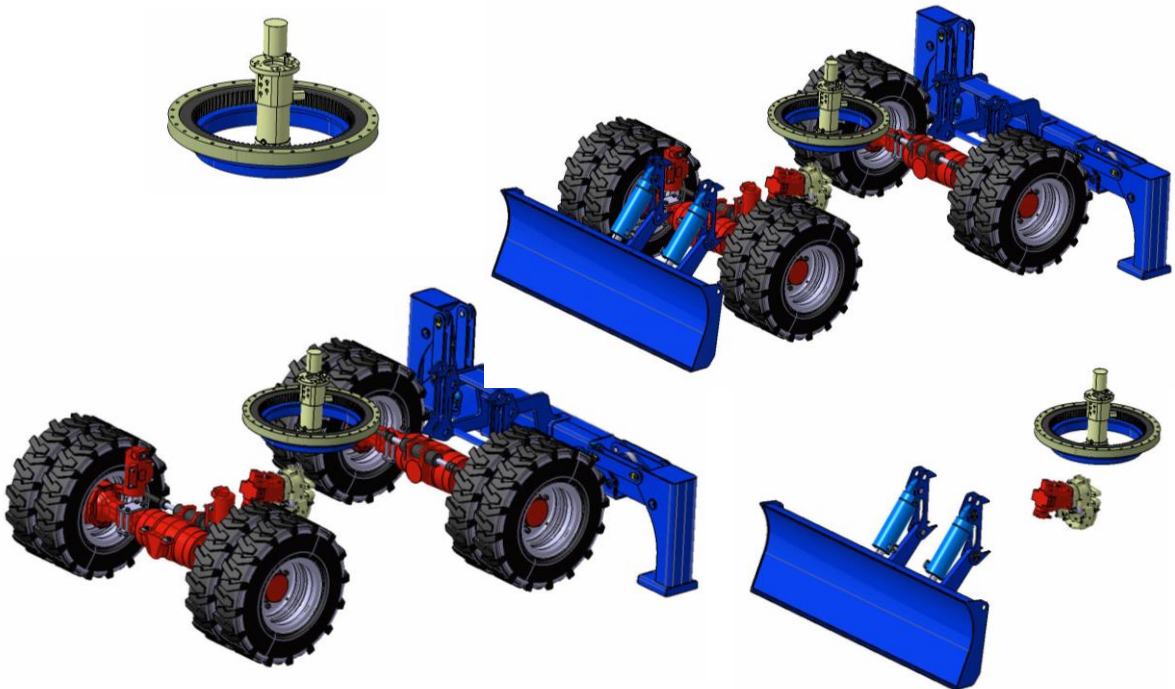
modules of each variants a) top left - common chassis platform, b) top right - wheeled chassis c) bottom left - self-propelled chassis, d) bottom right - crawled chassis.
